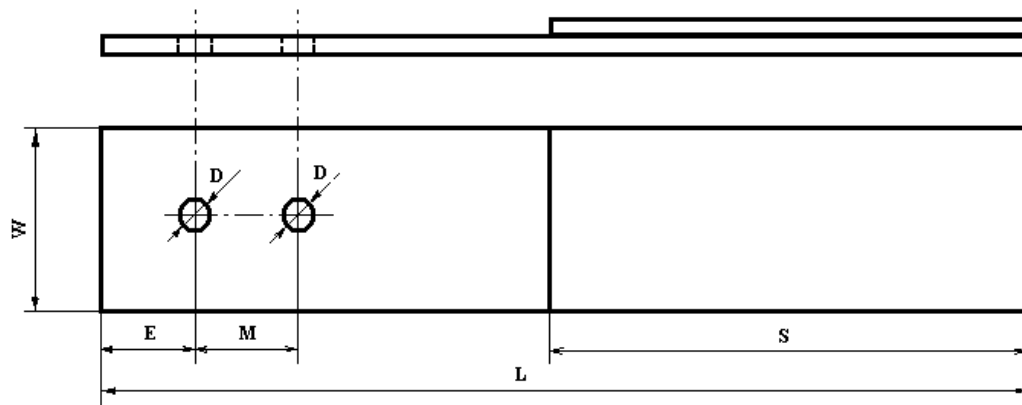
Composite specimen geometry for single lap double fastener bearing test
